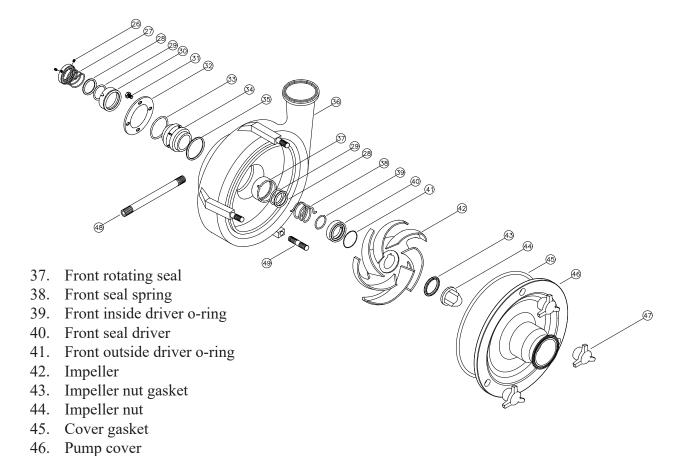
FP 3VR-BEARING BLOCK PUMP ASSEMBLY
